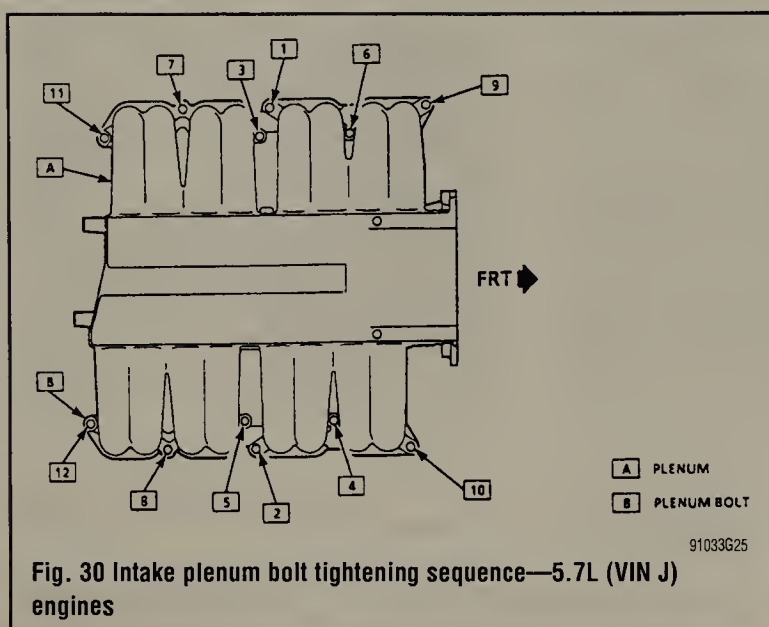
Intake plenum bolt tightening sequence—5.7L (VIN J) engines
